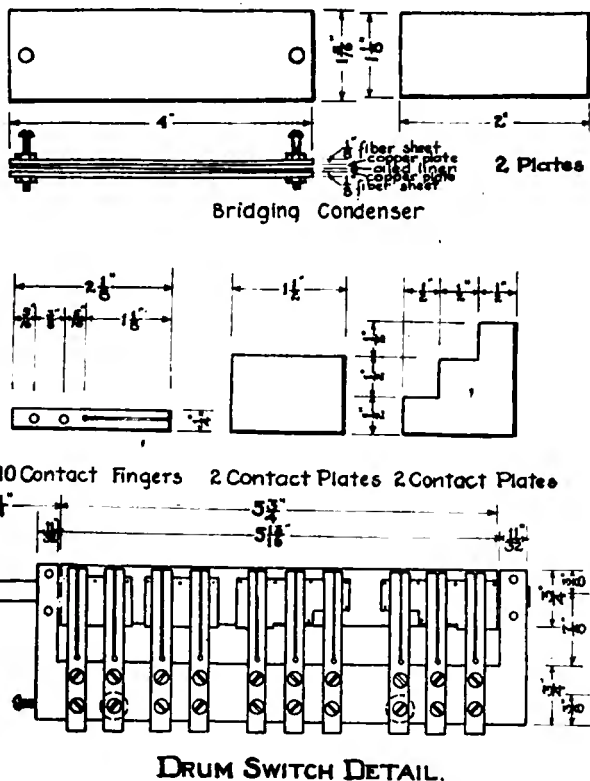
Detailed constructional plans of the bridging condenser and the drum switch
